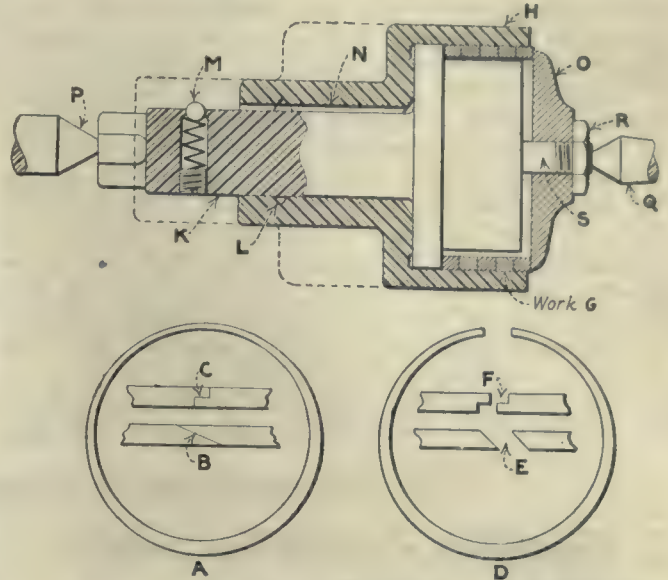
ARBOR FOR GRINDING ECCENTRIC PISTON RINGS
